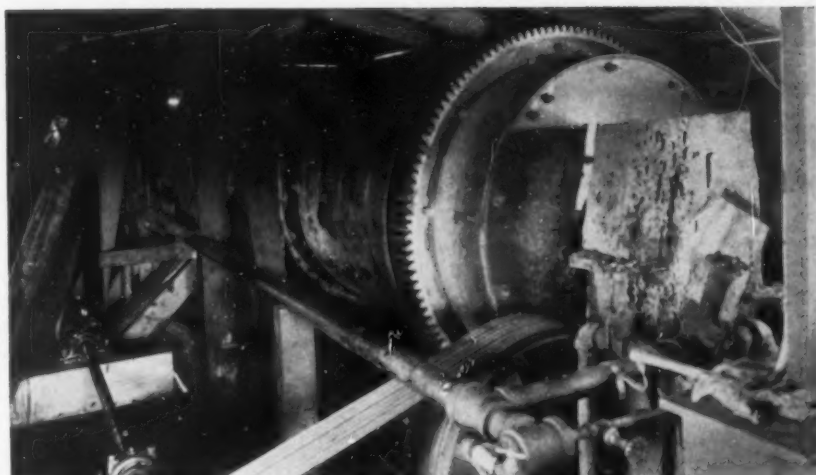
Ball mill type, high speed scrubber with removable steel liners to remove clay
